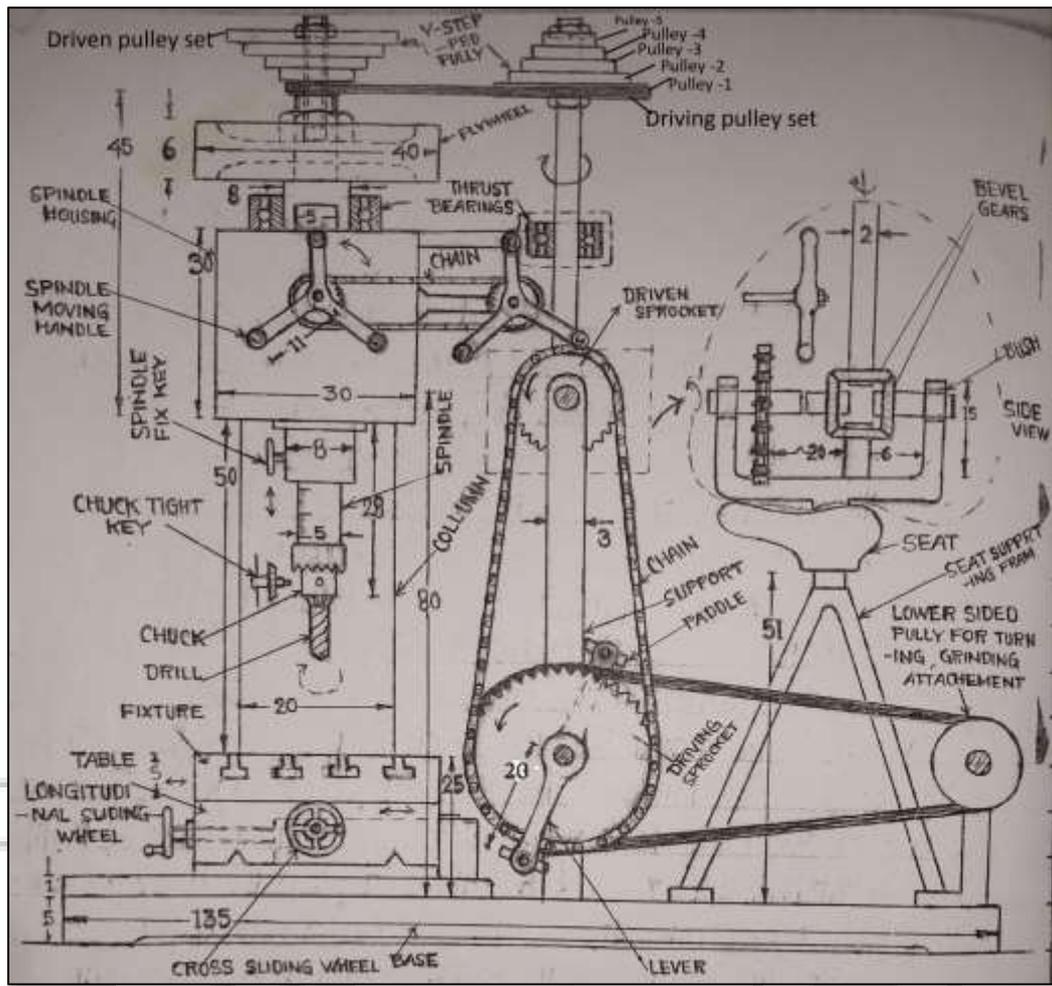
Fig. A: Manual general purpose machine tool (All dim. are in cm)
